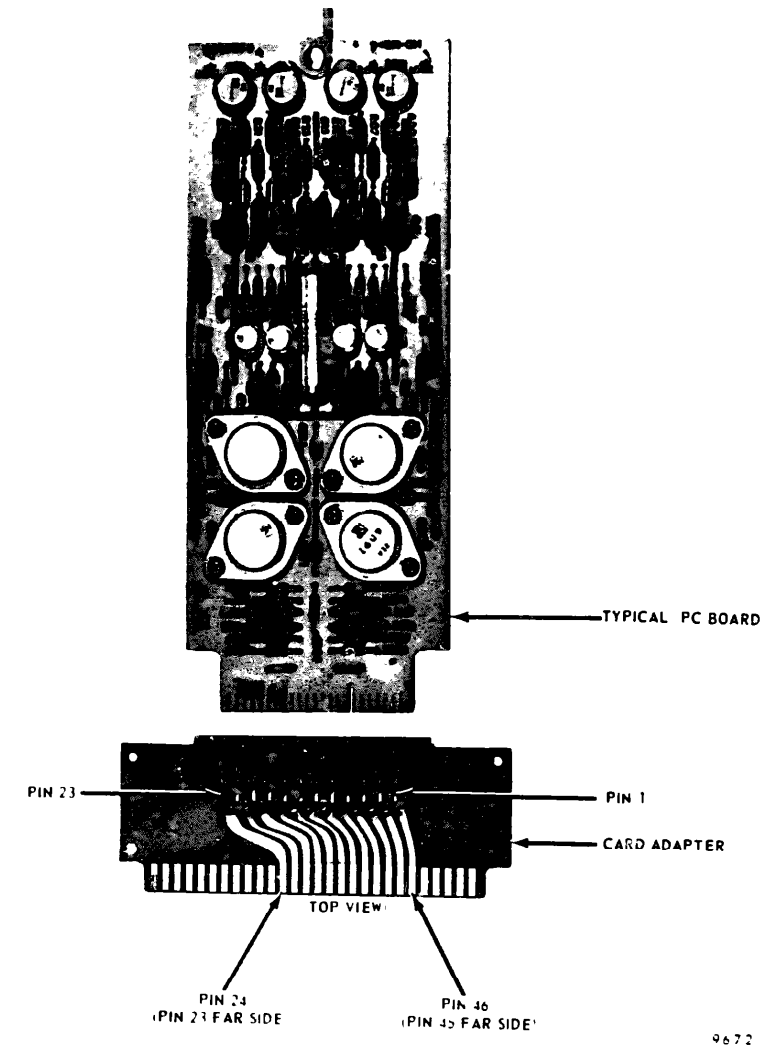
Printed Circuit Card Adapter MX-9089/USM-371
